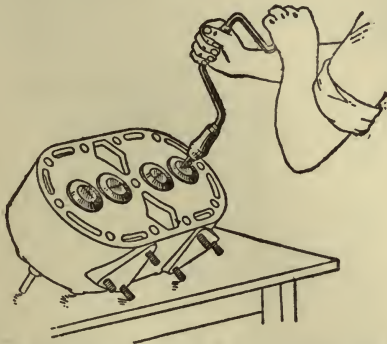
GRINDING VALVE IN DETACHABLE HEAD
